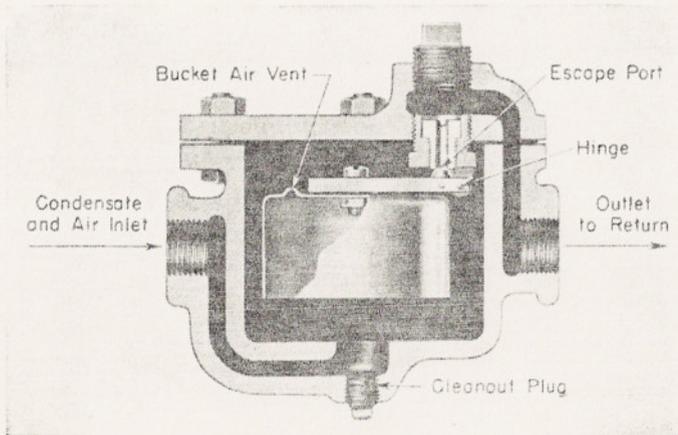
Inverted-bucket trap. (Courtesy Hoffman Specialty Manufacturing Corporation.)
